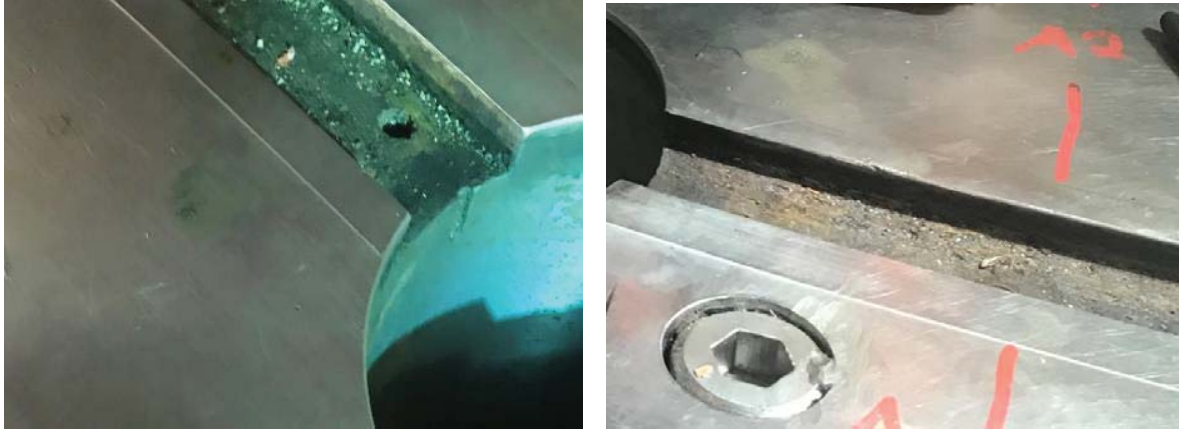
Bottom Ring, Seal Retaining Plate Groove
